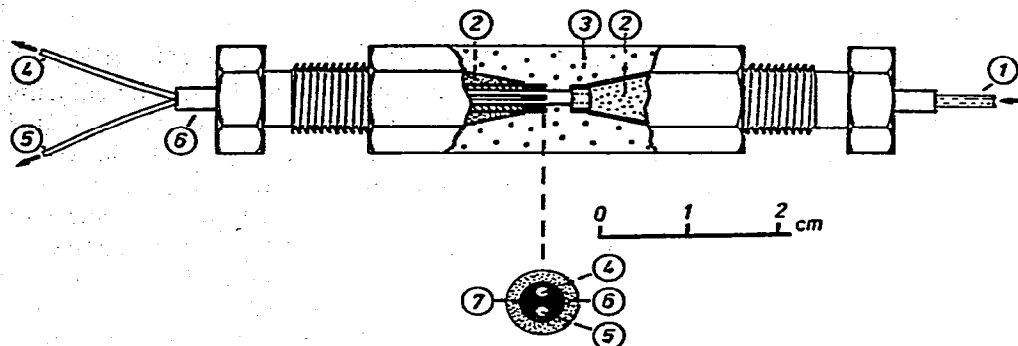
Design of the outlet splitter. 1 = Glass capillary; 2 = 1/16-in. Swagelock GC ferrules; 3 = Swagelock GC union; 4, 5 = Pt-Ir capillary tube; 6 = 1/16-in. steel capillary tube; 7 = seal of silver solder. Below: exploded view of vertical cross-section of the splitter.
